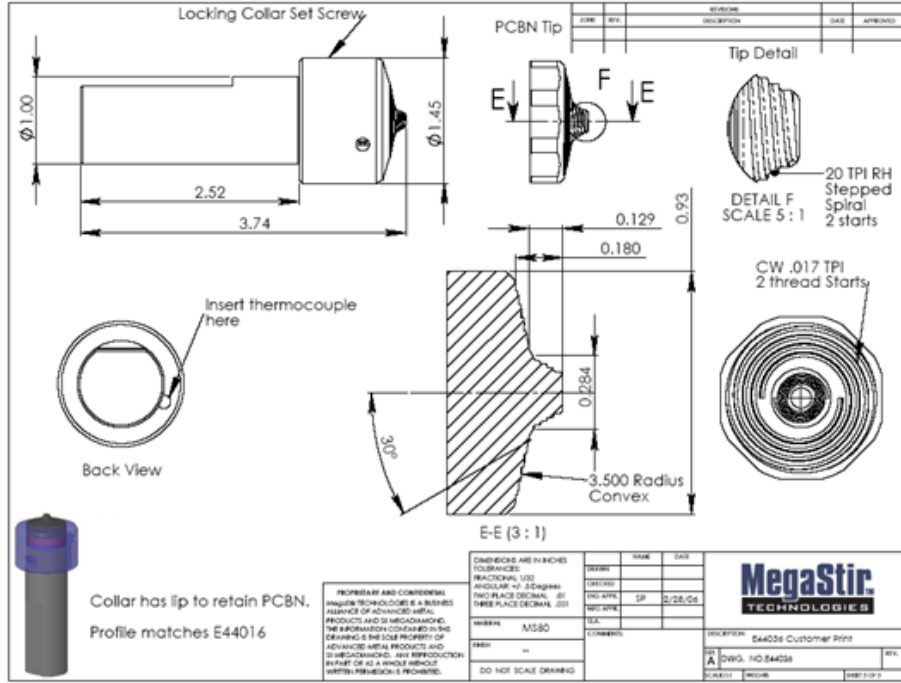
3 Engineering drawing of the PCBN tool used to FSW 304L.
